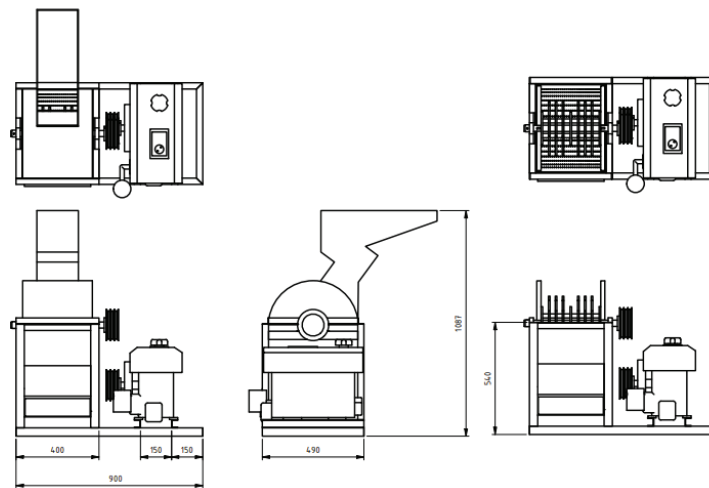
Sketch of a 2-Dimensional Grinder Machine for Processing Pottery, Tile, and Brick Waste.
